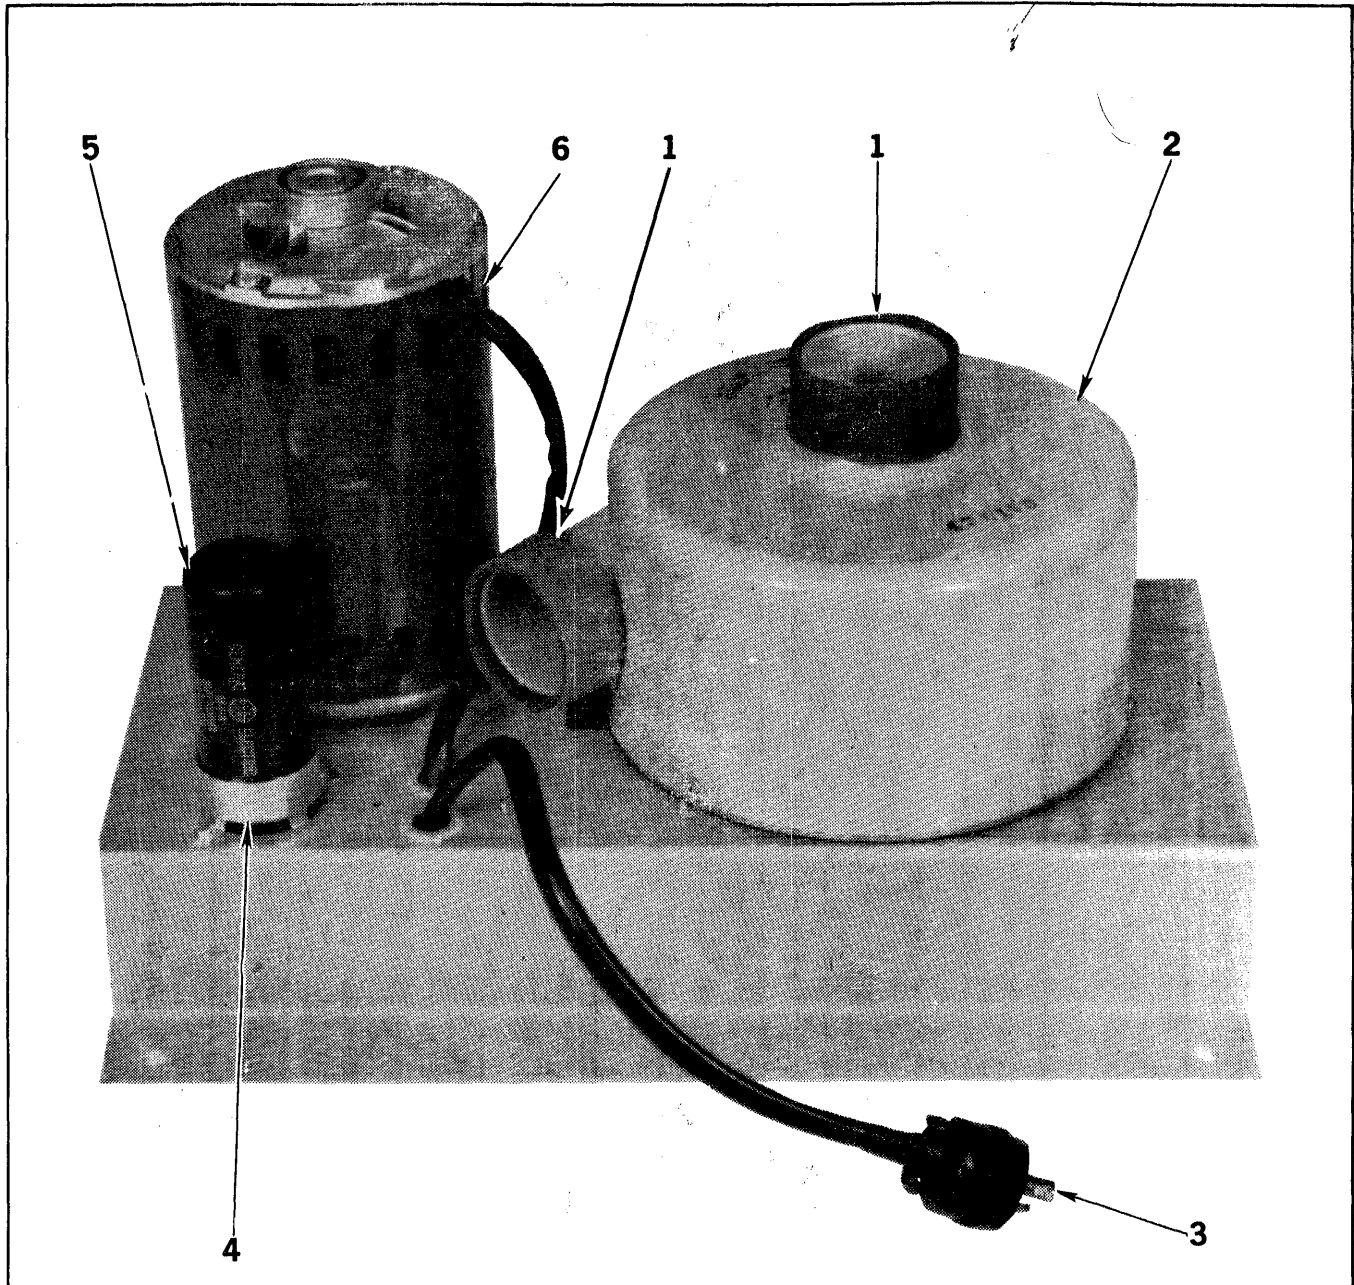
Vacuum Blower Assembly: Bottom View
